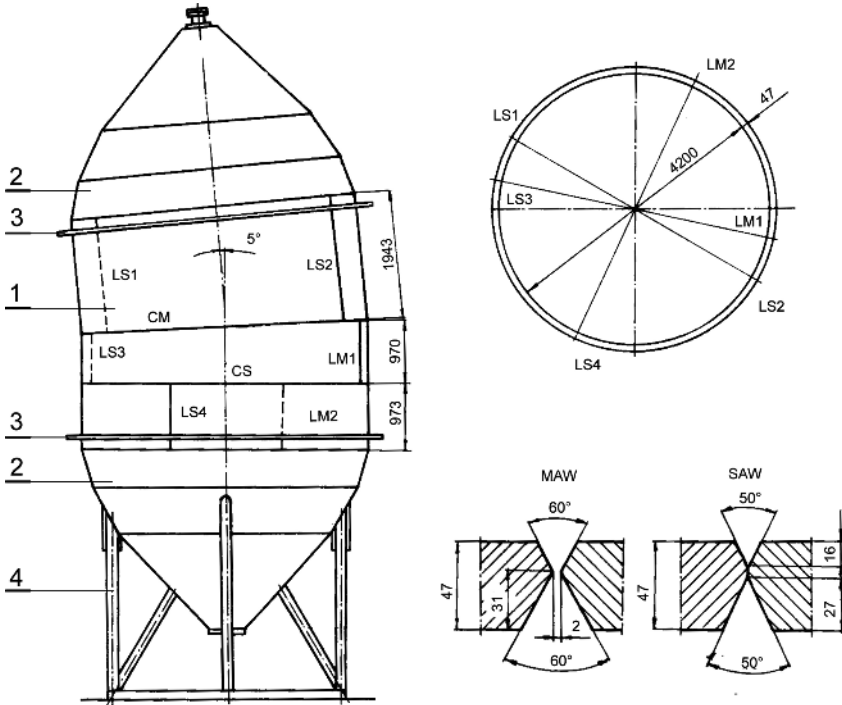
Design of penstock segment full-scale model: 1–mantle; 2–lid; 3–stiffener; 4–support. L–longitudinal, C–circular; MAW–manual arc welding (M); SAW–submerged arc welding (S).
